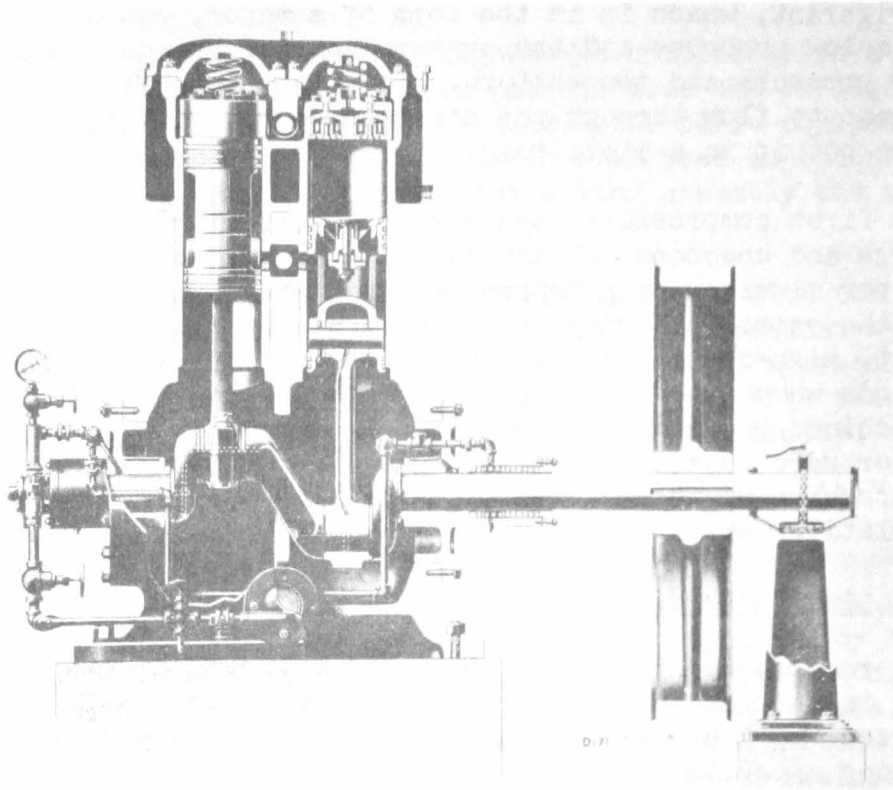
An ammonia, single-acting reciprocating compressor. In this compressor, the suction gas enters the cylinders through valves in the top of the pistons and is discharged through plate-type valves in the cylinder heads. (Photo courtesy of Frick Company)
